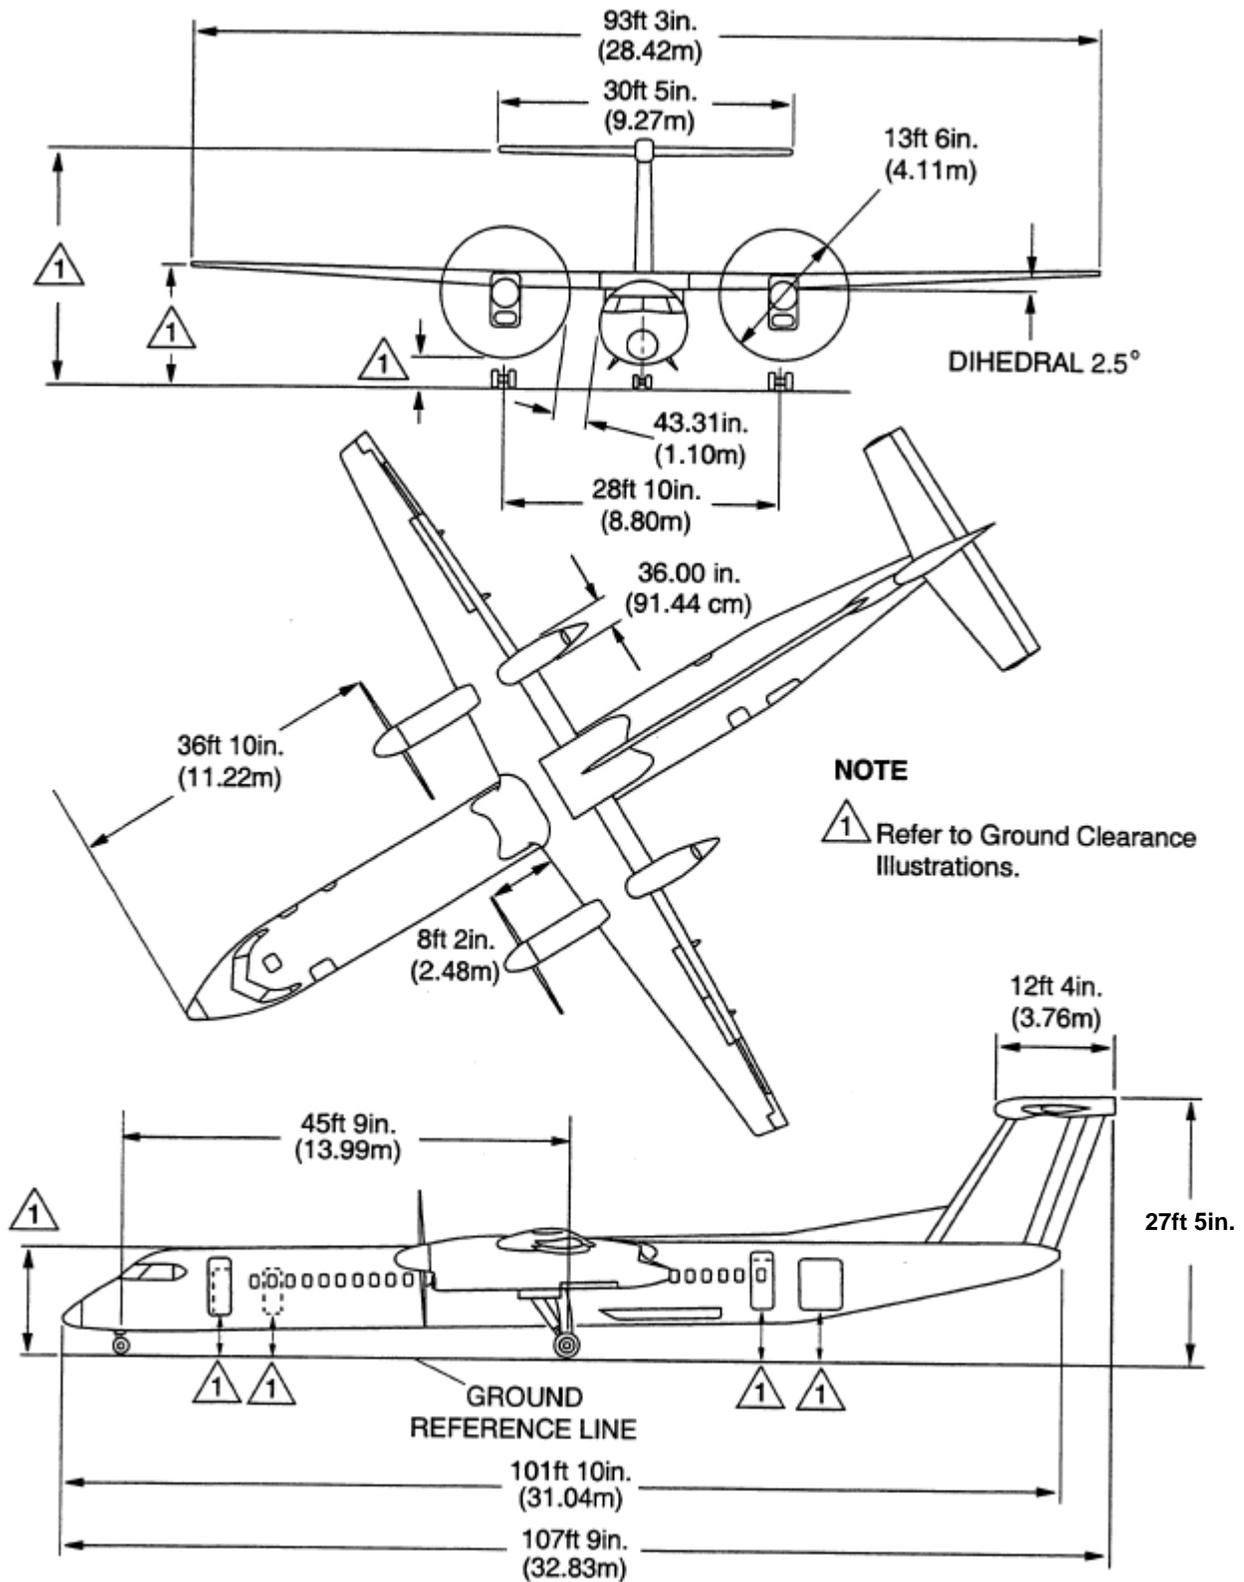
Bombardier DHC-8-400 3-view Drawing
